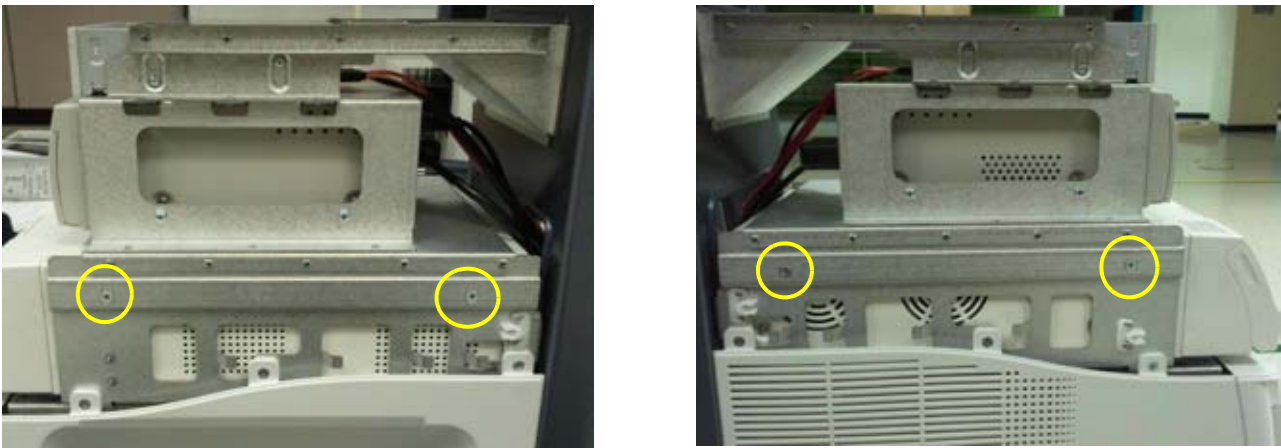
Assemble COLOR PRINTER ASSY to HIGH FRAME ASSY with 4 screws (5178673, FH M4X6)
